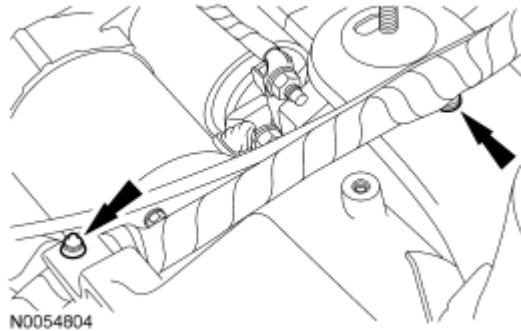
Locating Wiring Harness Retainers From Transmission Mount & Battery Tray Bracket
